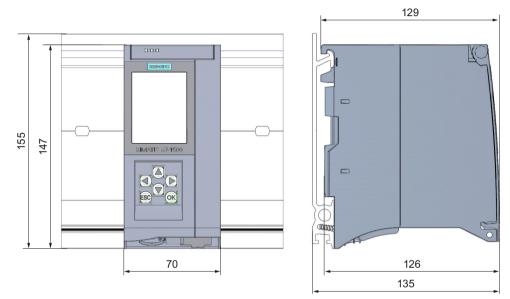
Dimension drawing of CPU 1515R-2 PN, front and side views
